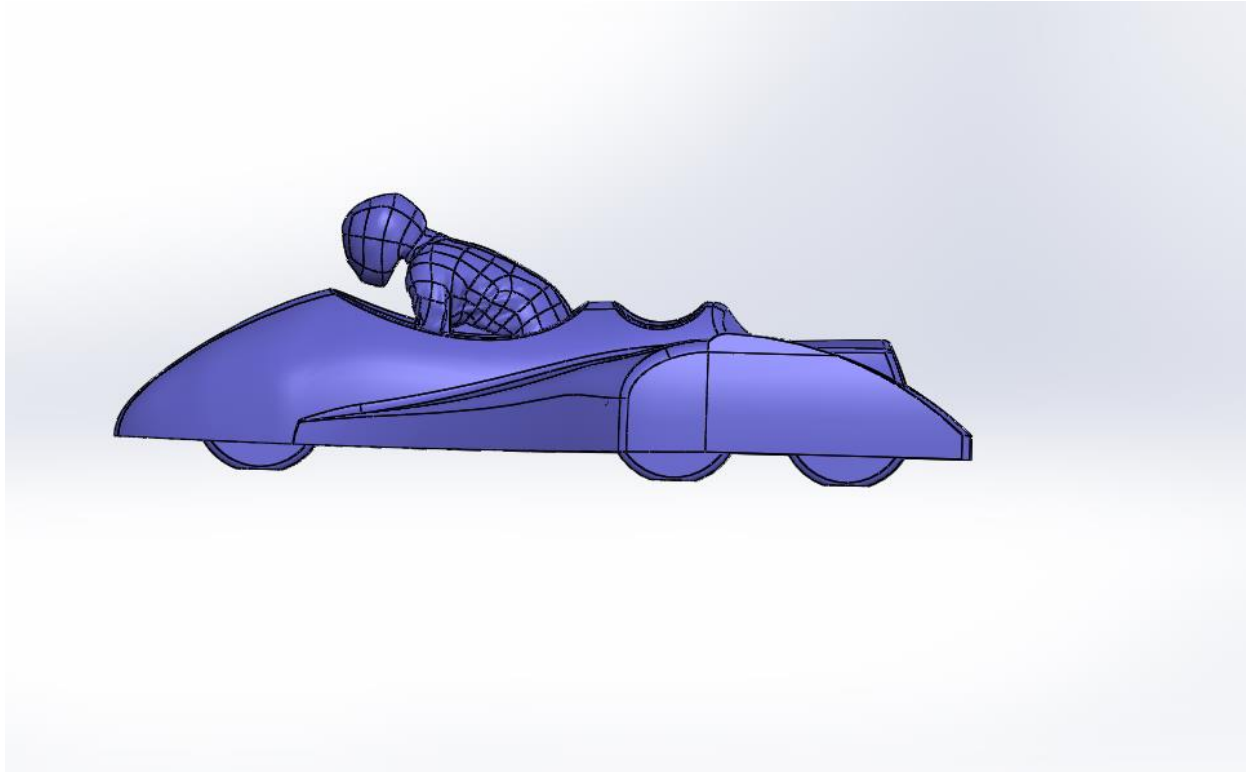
New rear section with radiused upper surface and flat floor (Version 60-1)
